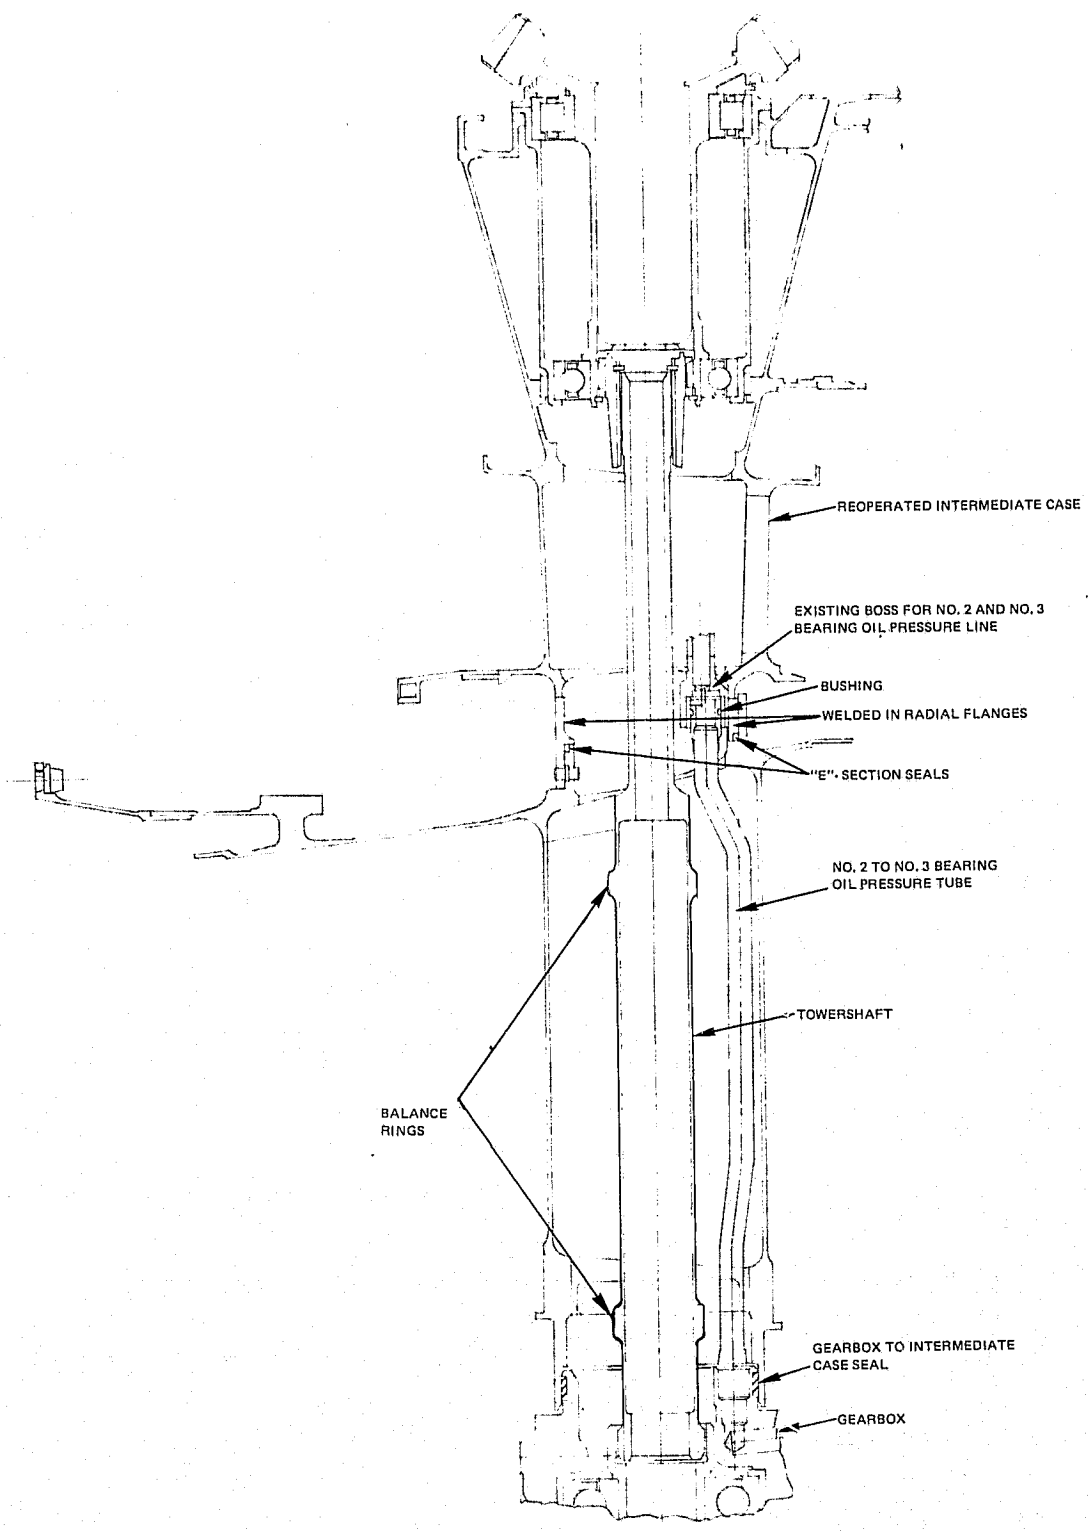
JT8D-100 Intermediate Case – Towershaft Cross Section
